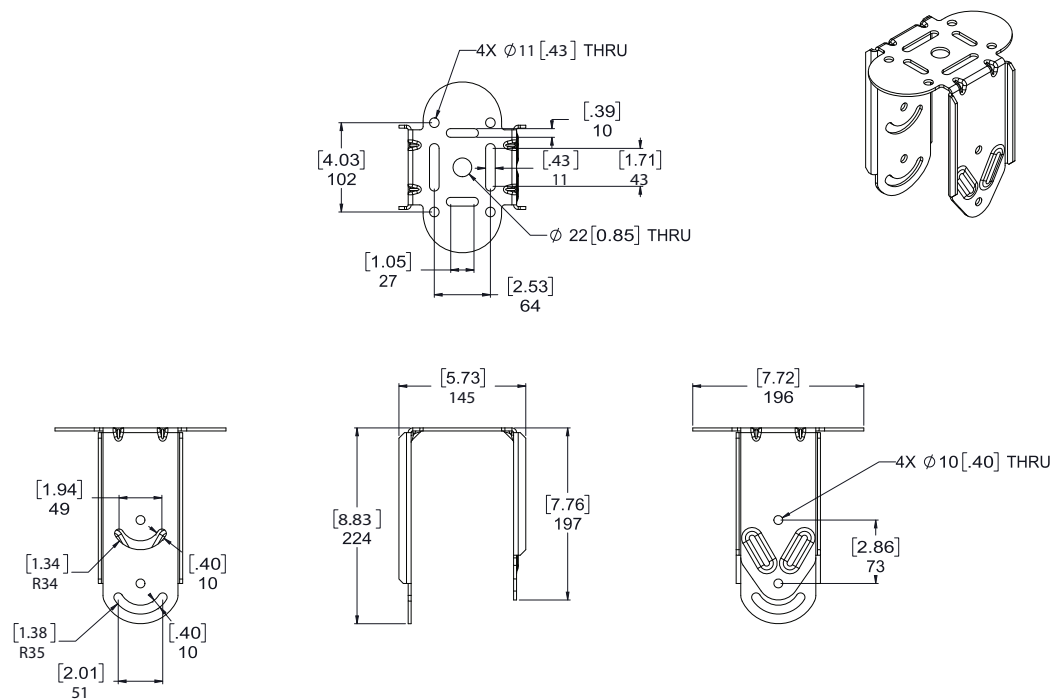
MMA-1090 Yoke [Inches] Millimeters
